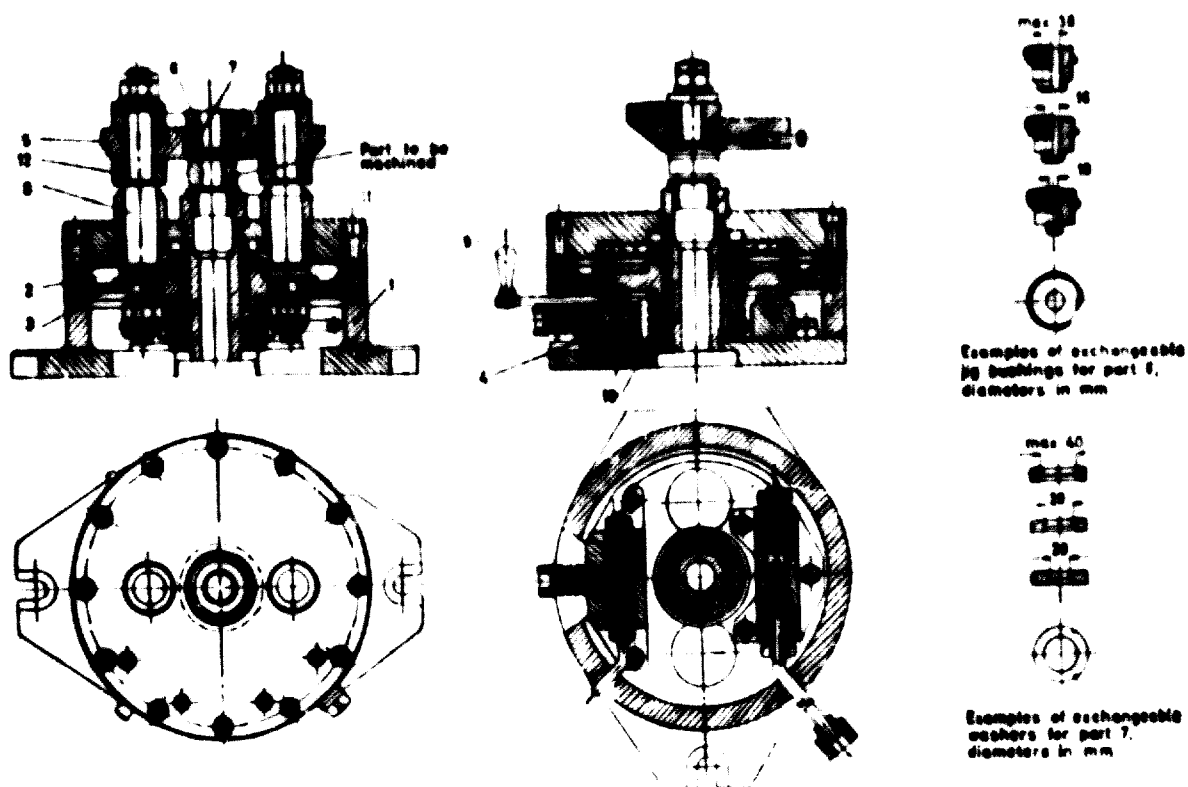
Group-adaptable drilling fixture with pneumatic clamping
